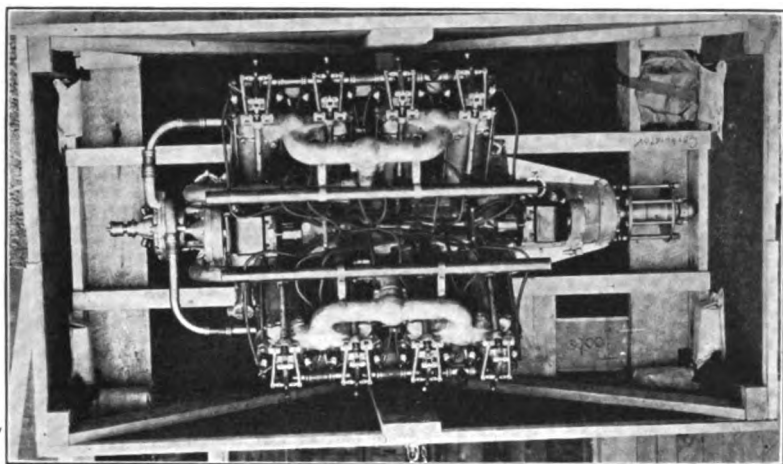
Top view of engine, showing arrangement of cylinders.
